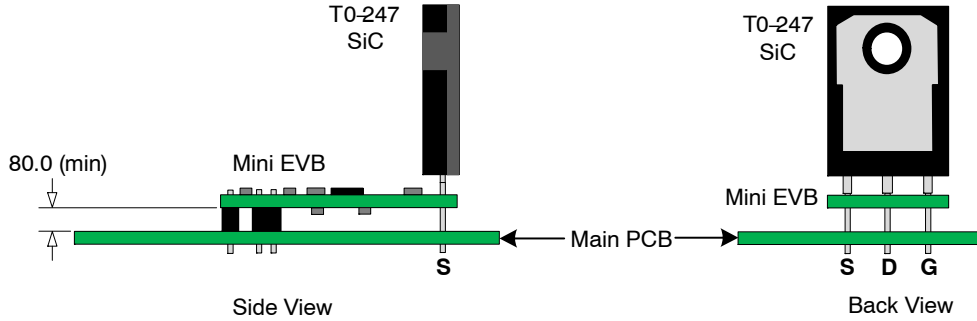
New PCB Design using 100 mil Interconnect Header Pins (80 mil minimum mounting height)
